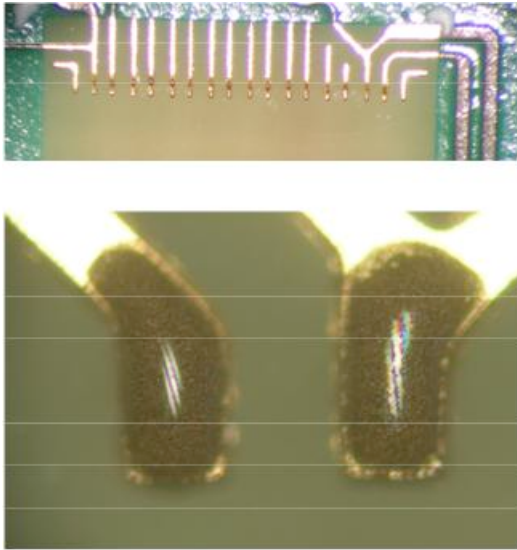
Result from the printing of the adhesive using a stencil printer. a) Evenly spaced stencil openings of 100 µm printed using standard settings. b) Close-up shows some minor bleedings of the adhesive. (Photo: FFI/Per Dalsjø)
